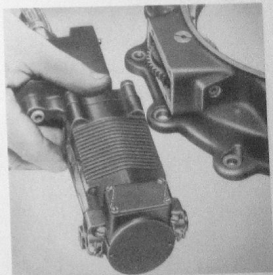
Assembling Auxiliary Motor-Wiring Harness Unit to Control Support
